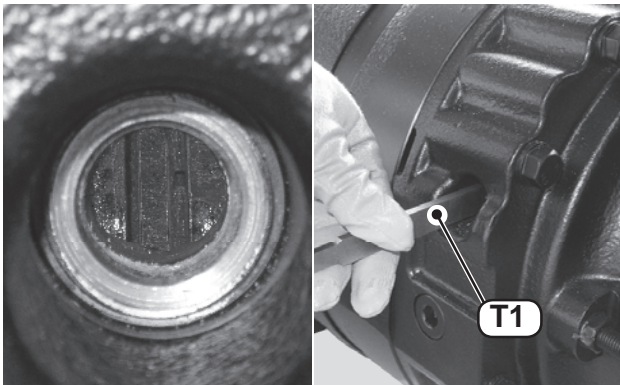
Apply the parking brake (or have someone hold the service brake) and with either brake applied, check the distance between discs using tool T1 (See drawing T1 p. 28). Minimum distance: 5,2 mm
